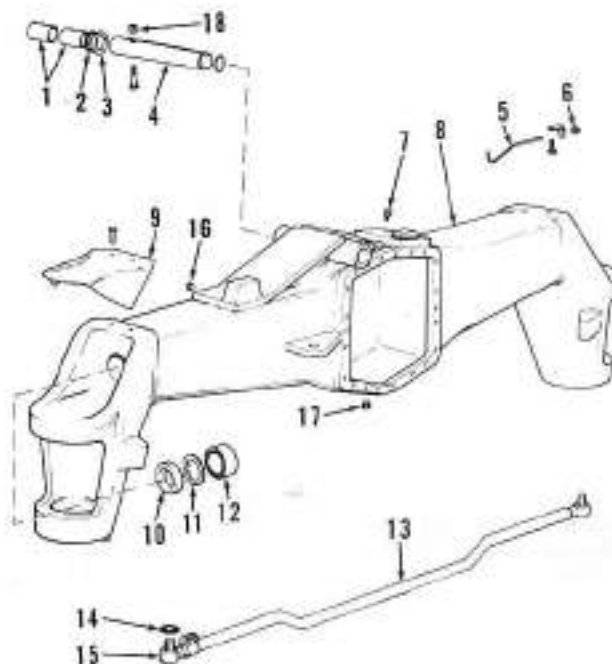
View of front axle housing used on Model 1210 four-wheel drive tractors.
